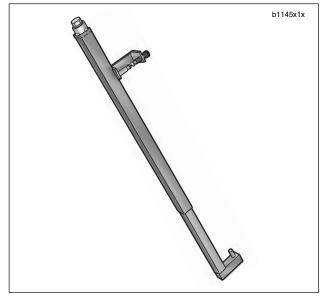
Fork Spring Compressing Tool (HD-45966)
